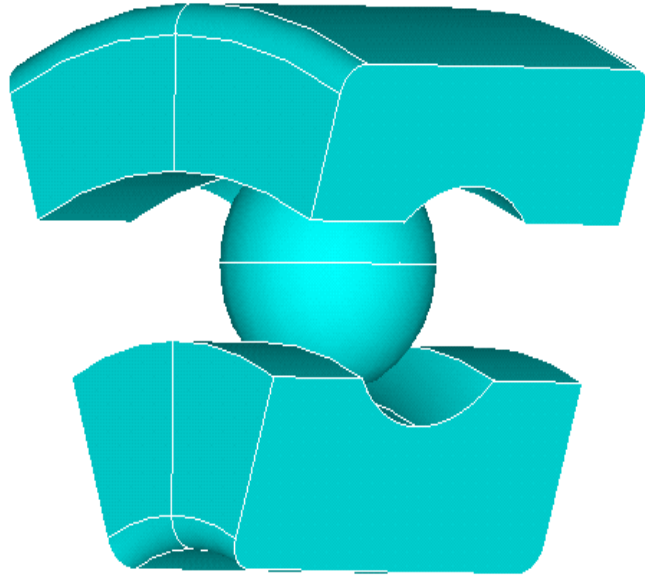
Three-dimension sub model of single row deep groove ball bearing for particulate filled metal alloy composites
